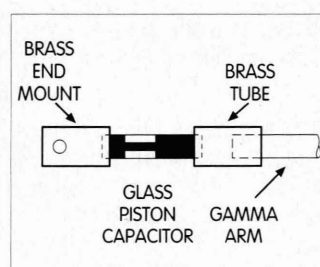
The first attempt at constructing the gamma match section with a glass piston capacitor soldered to small sections of brass tubing for connections to the mounting insulator and gamma aluminum rod.
